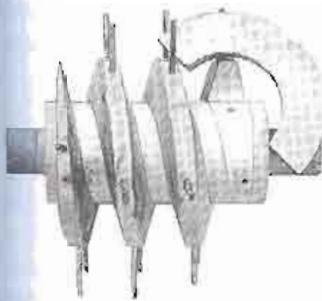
Loose-piece pattern for molding a large worm gear. After sufficient sand has been packed around the pattern to hold the pieces in position, the wooden pins are withdrawn. The mold is then completed, after which the pieces of the pattern can be removed in a designated sequence.
